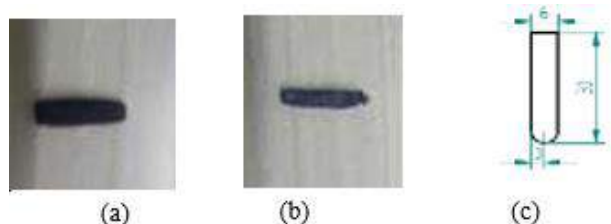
(a) Rubber specimen without graphene added. (b) Rubber specimen with graphene added (c) Actual dimension of specimen.
